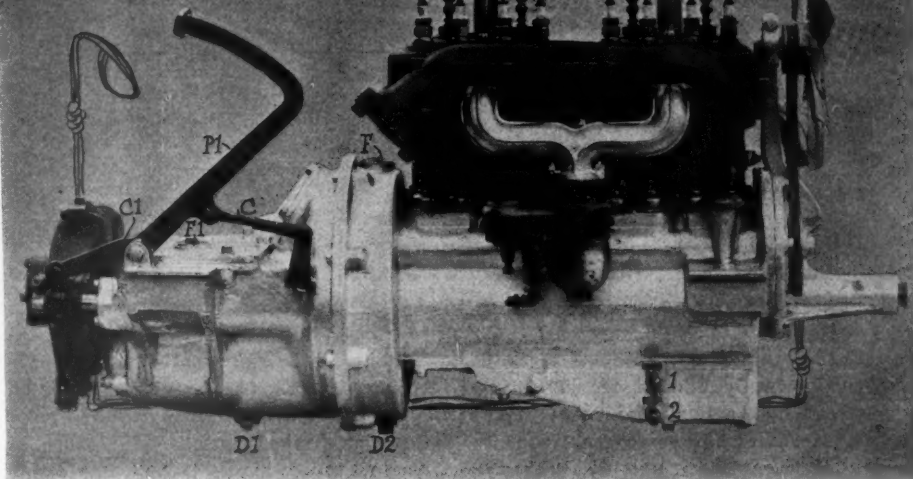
VALVE SIDE OF HERRESHOFF MOTOR
